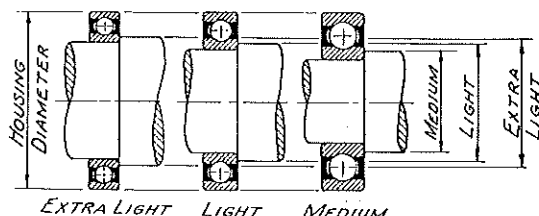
Ball bearing housings. Courtesy New Departure Division of General Motors.
